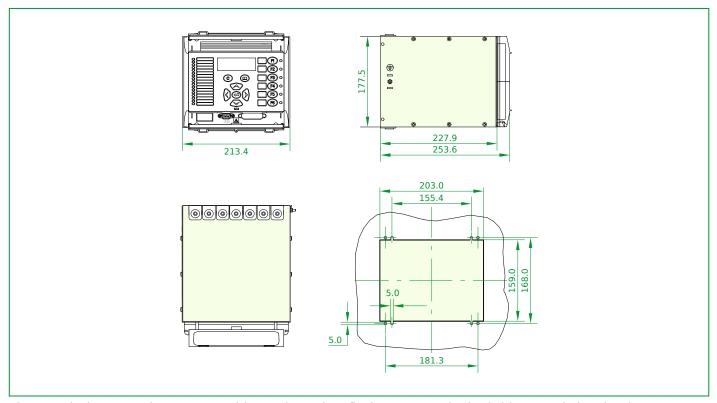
Flush-mounted case 40 TE with panel opening, flush-mount method 1 (without angle brackets). (Dimensions in mm.)
